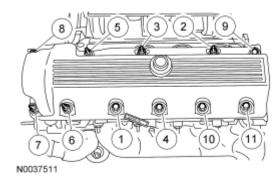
Valve Cover Torque Sequence Courtesy of FORD MOTOR CO.
